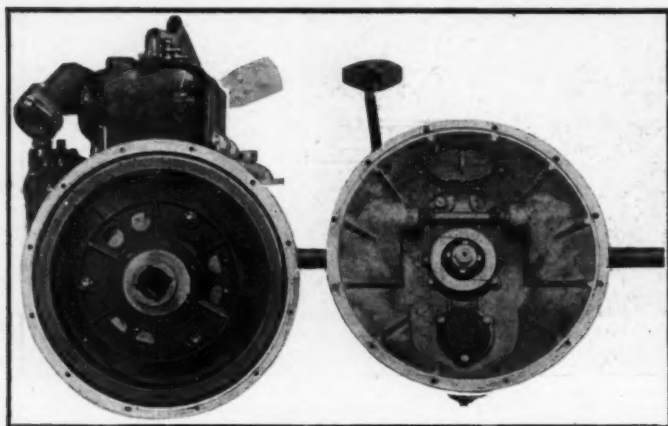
Looking at the motor with the transmission gear removed, showing the housing in the flywheel
